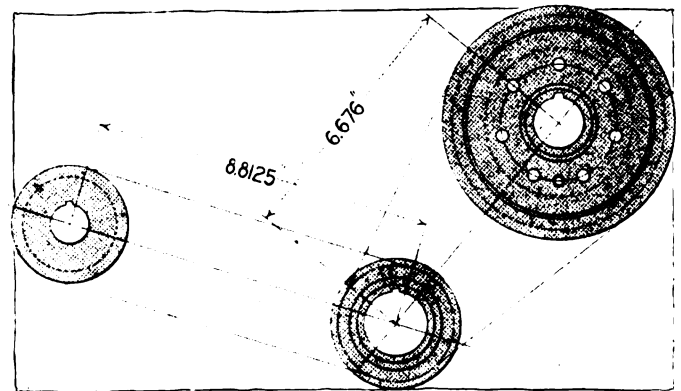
Relative position and sizes to scale of magneto and eccentric shaft chain drive
